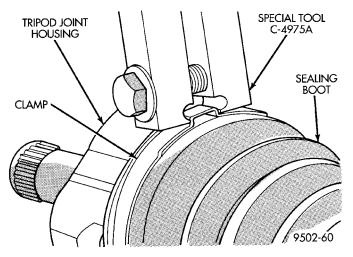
Crimping Tool Installed on Sealing Boot Clamp
